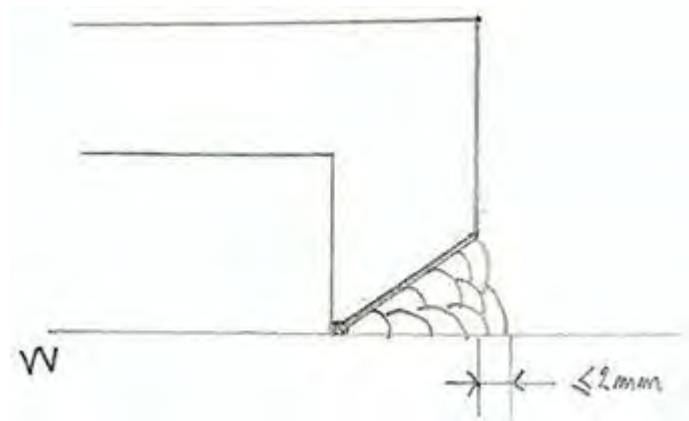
Schematic view of a full penetration weld of a pad on the VV main body weldment.
